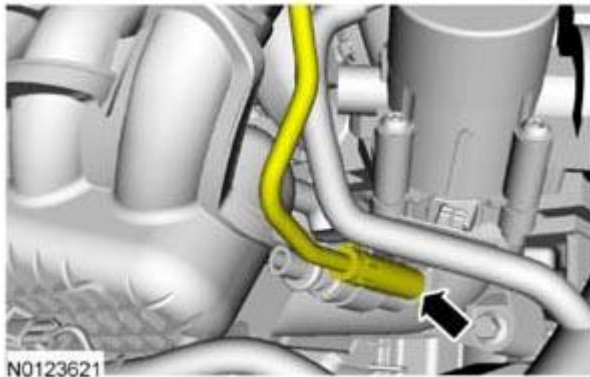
Locating EVAP Canister Purge Valve Tube From Intake Manifold
